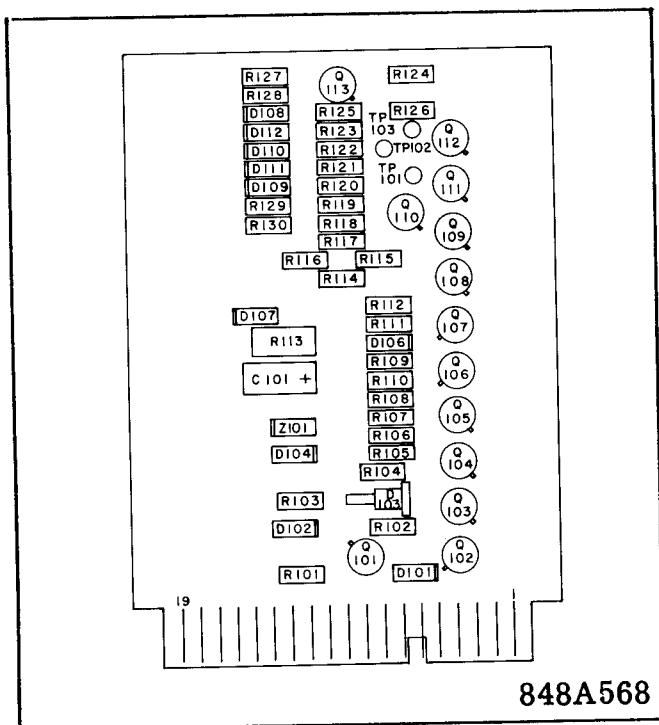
Component Location on Amplifier and Keying Printed Circuit Board for Type SKBU Relay
